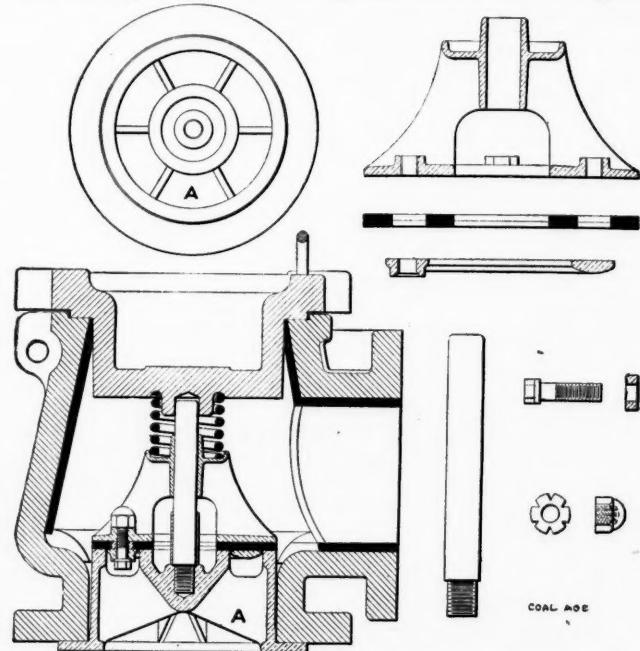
SECTIONAL DRAWING OF VALVE CHAMBER AND VALVE
